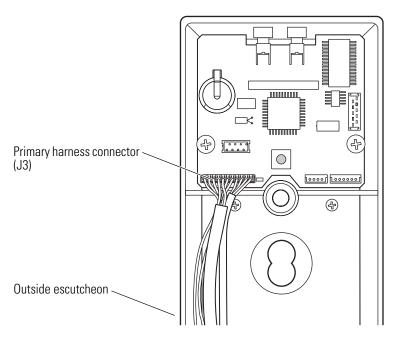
Removing and reinstalling the primary harness from the electronics board (B.A.S.I.S. smart card reader shown)
